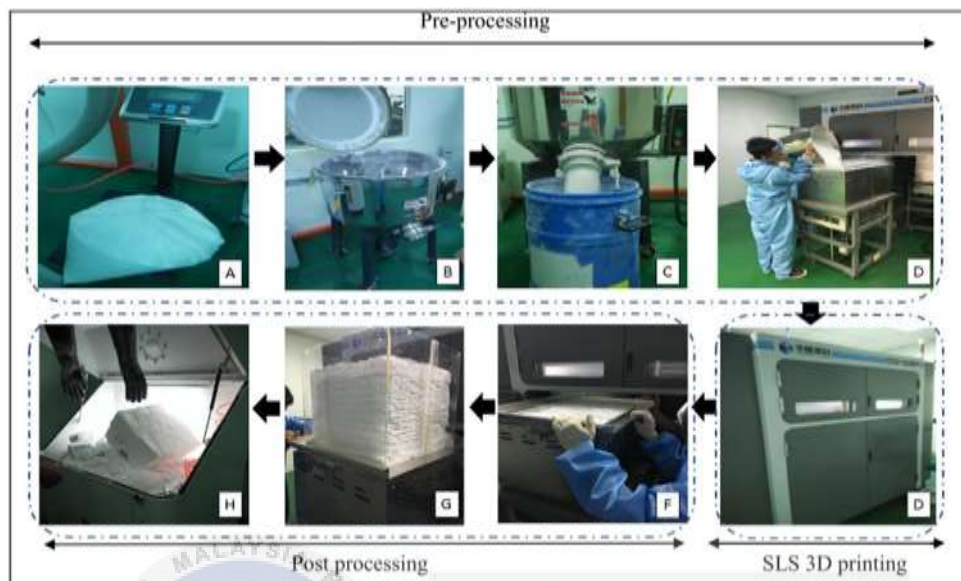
Sintering process flow using Farsoon SS402P machine.
